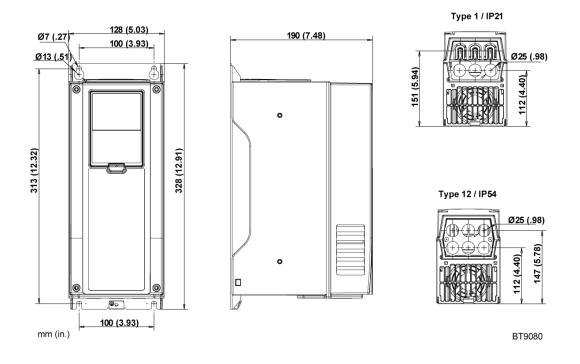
Siemens Drive Dimensions, FS4, Wall-Mount.
